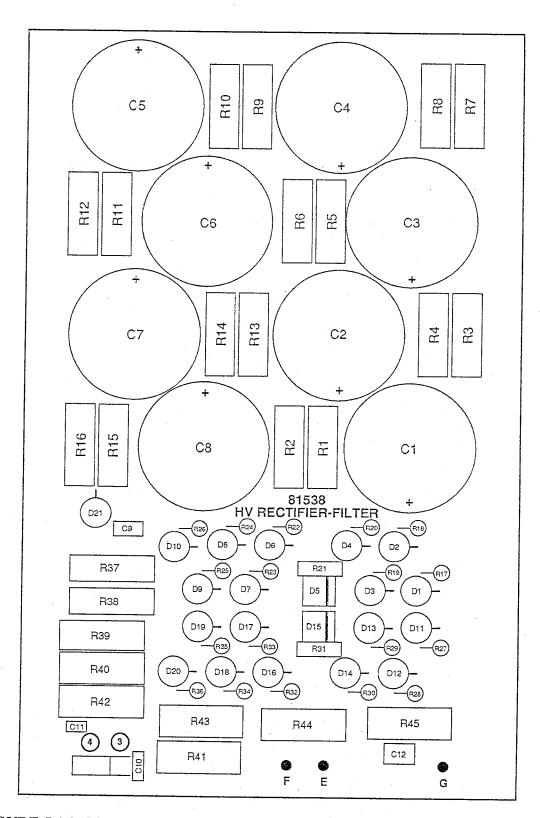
81538 HV RECTIFIER-FILTER BOARD COMPONENT LAYOUT
